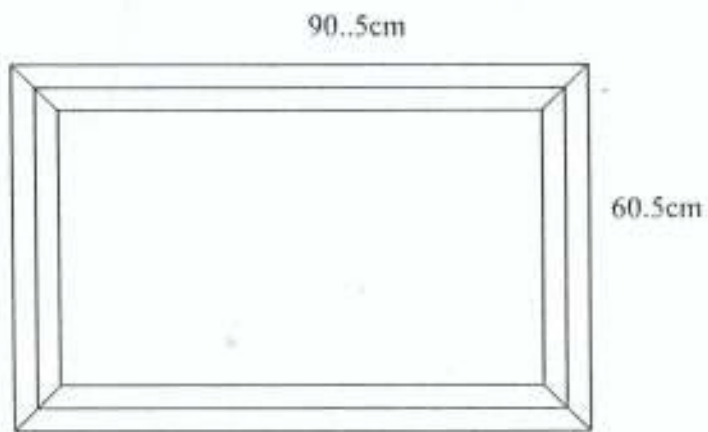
Cooker seating shown the welded joint
